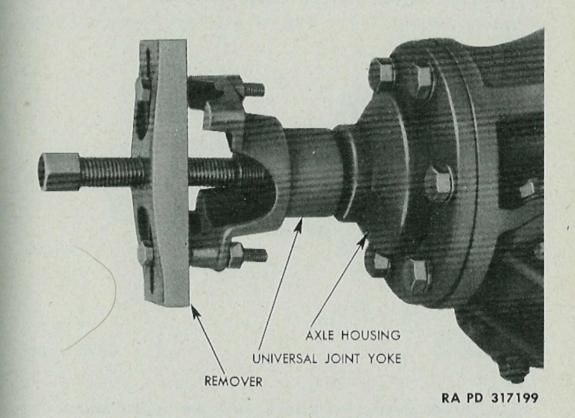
Removing Universal Joint Yoke with Remover 41-R-2384-82
